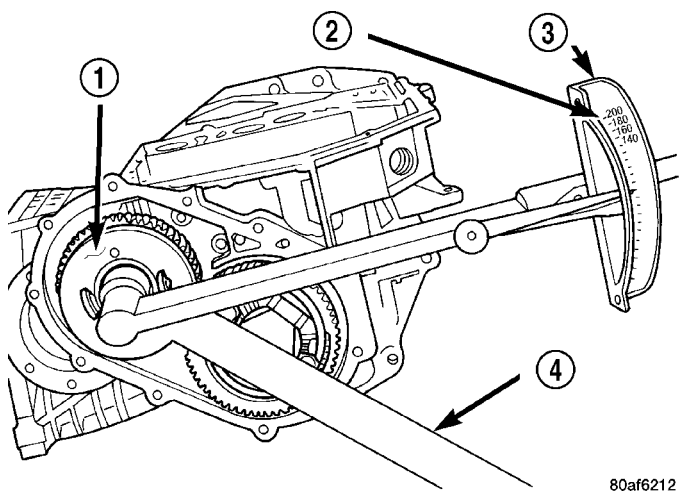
Tighten Transfer Gear Nut to 271 N·m (200 ft. lbs.)
